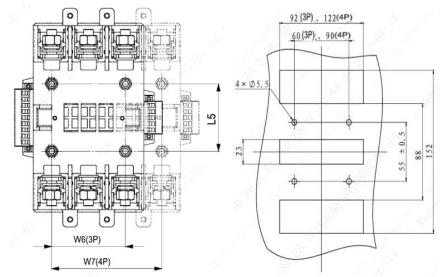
3P, 4P Outline and installation dimensions of plug-in board front wiring Table 20 3P, 4P The overall dimensions of plug-in board front wiring (horizontal) and circuit breaker after installation are shown in the figure below (unit: mm)
